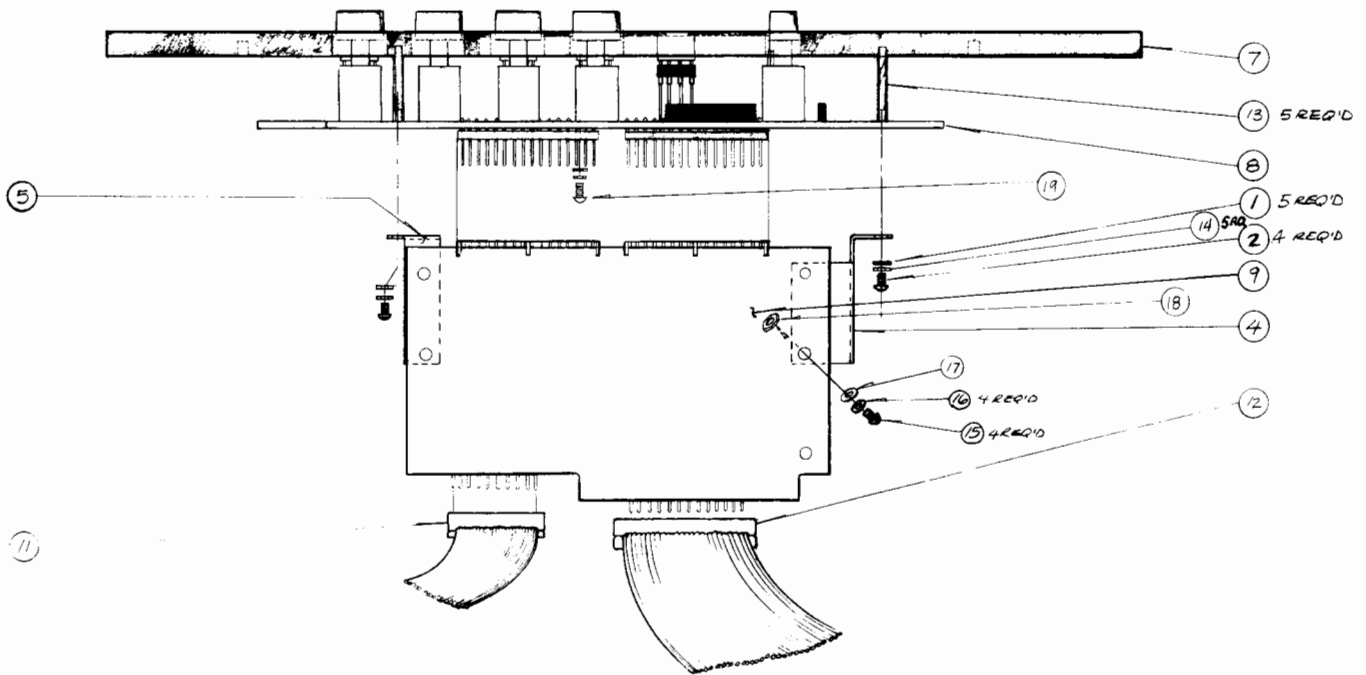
Operator Control Panel Assembly (07976-60010) Parts Location Diagram
